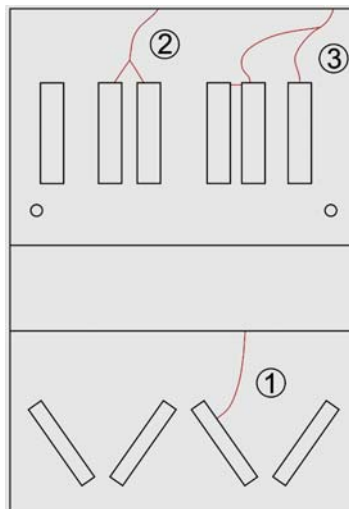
Locations of the 3 different weld lines investigated areas on the surface of the micro injection moulded part.
